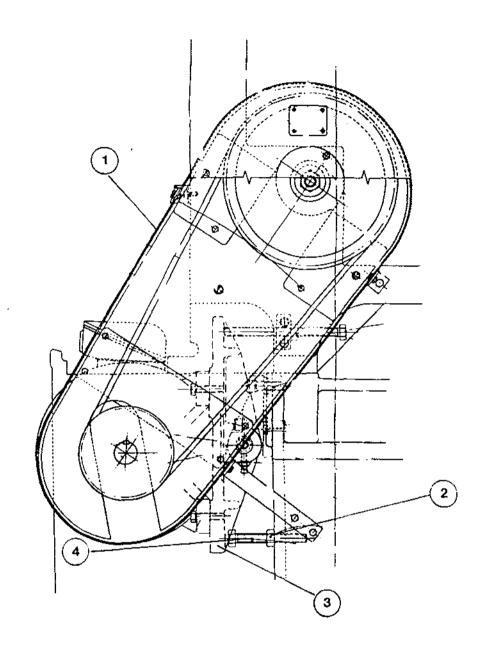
Gearing and Camshaft layout Drg.200Z54A
